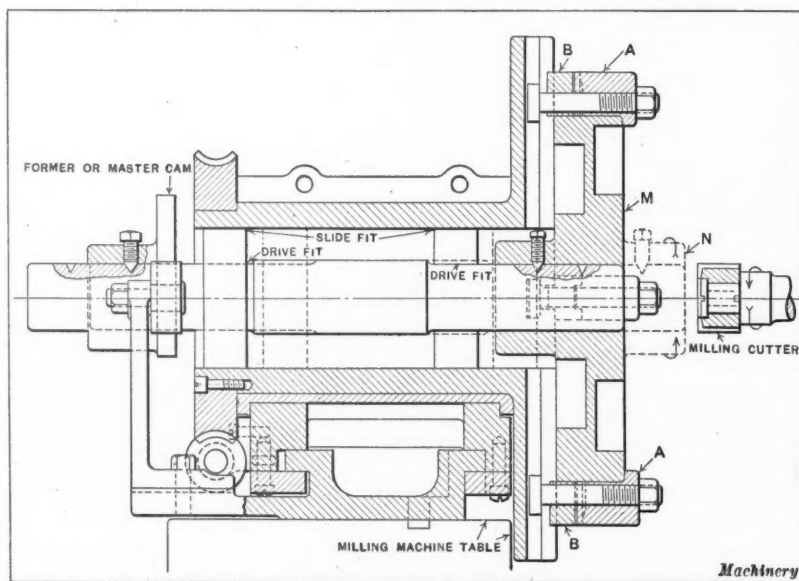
Sectional View through Work-holding Spindle showing Important Details of Construction
